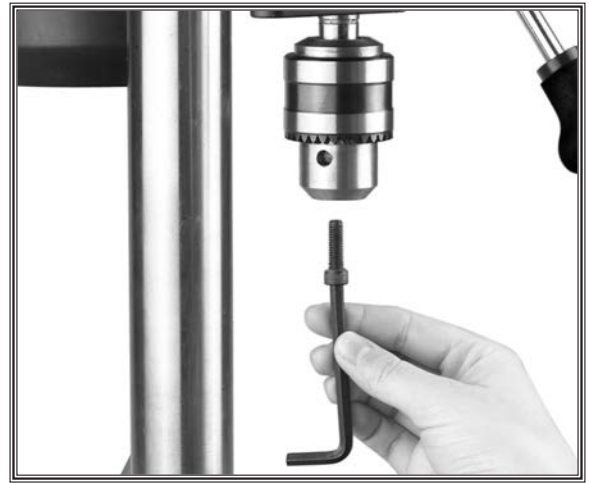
Inserting the hex cap screw (chuck guard removed for clarity).
